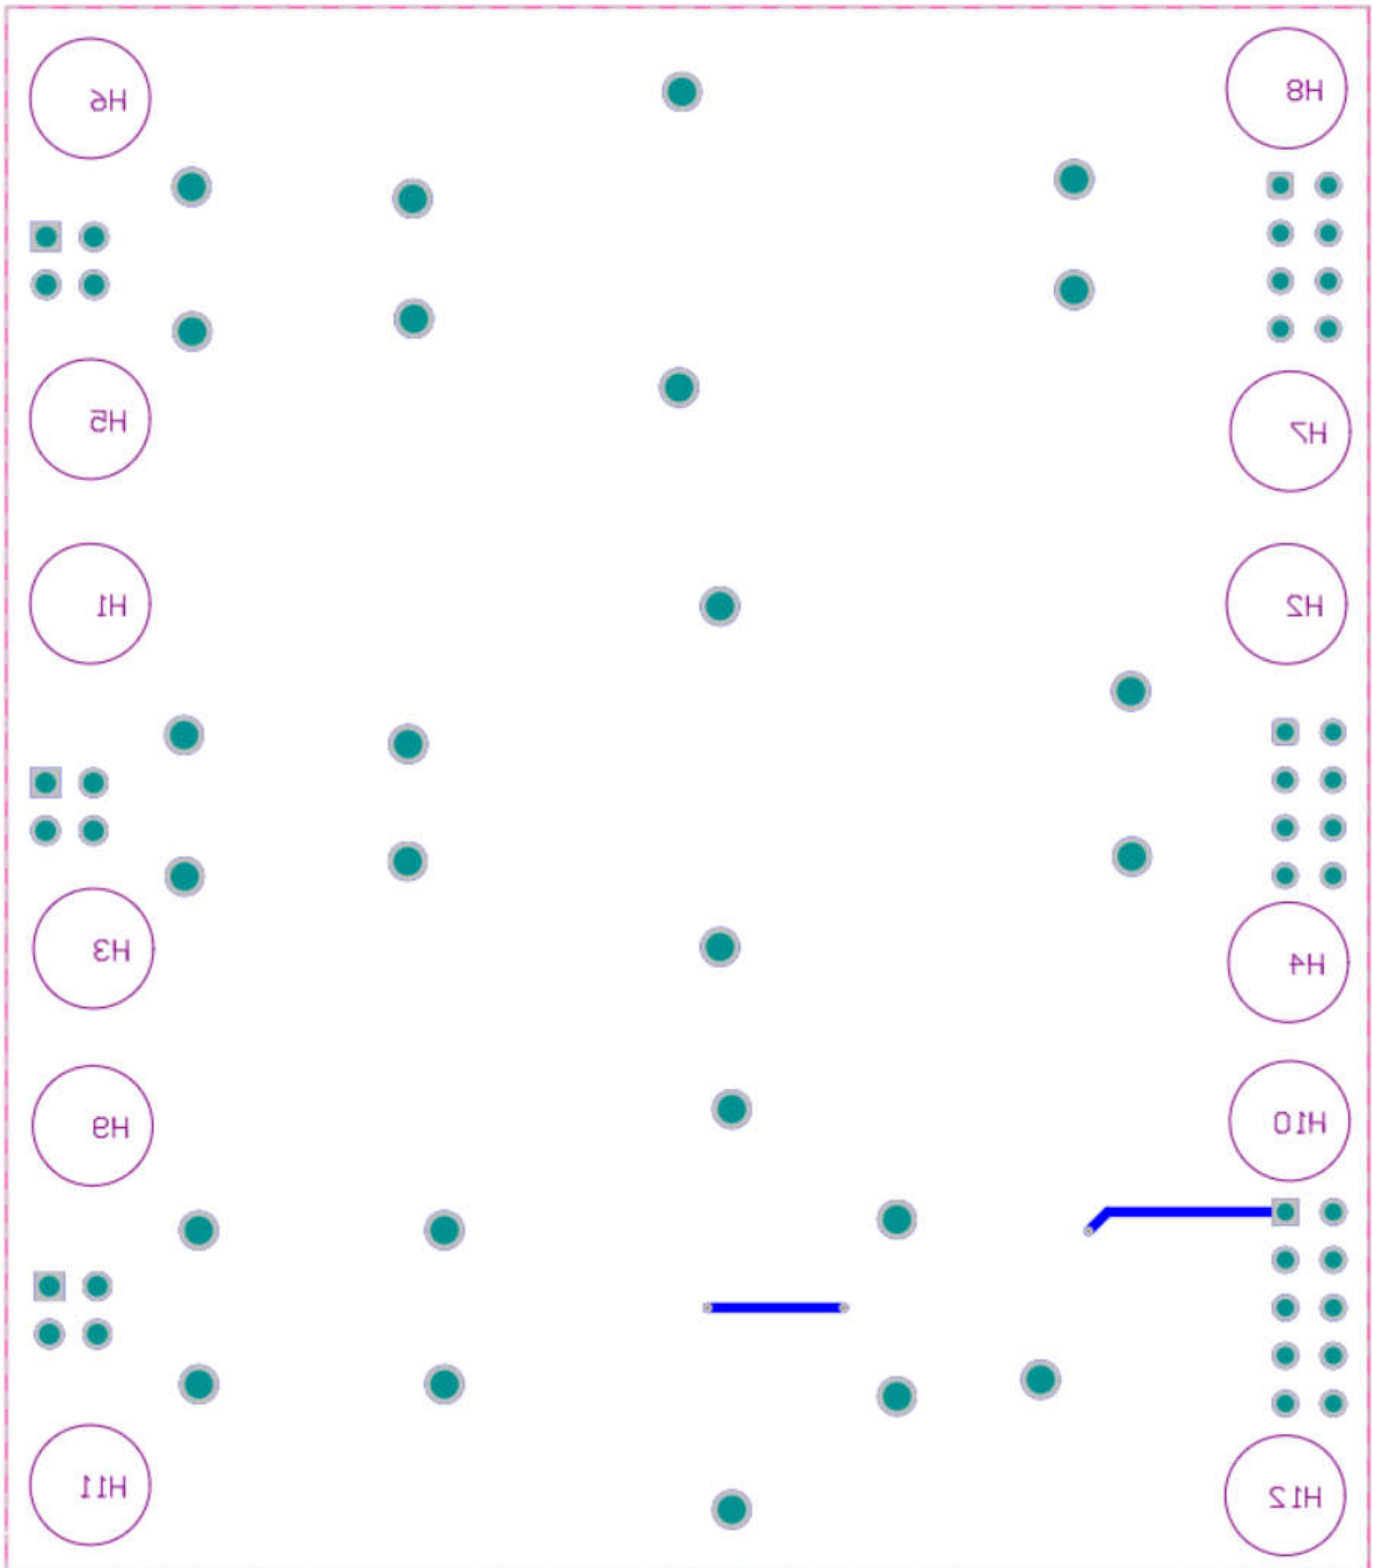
ISOM-EVM PCB Layout - Bottom
